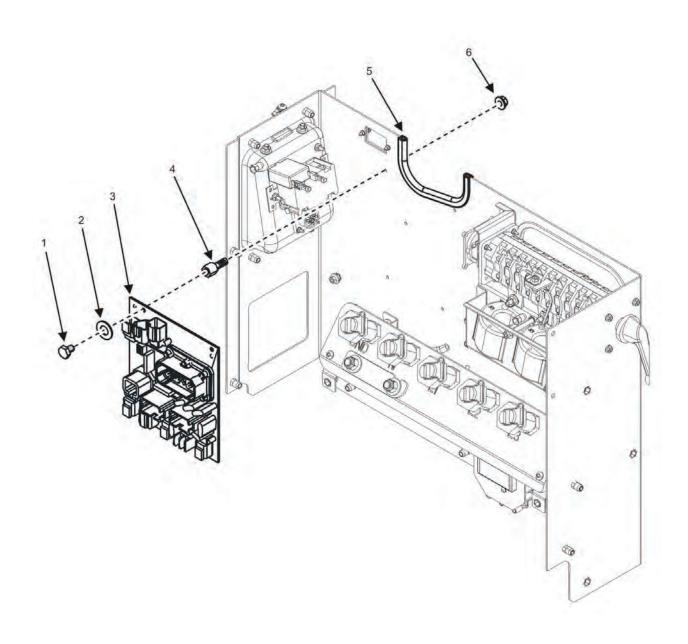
Printed Circuit Board Module (Sheet 1 of 3).
